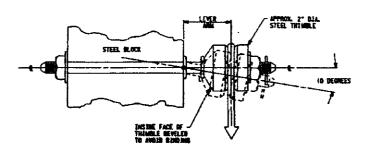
SINGLE AND DOUBLE UPSET SPOOL INSULATOR BOLT ASSEMBLIES TS 109
